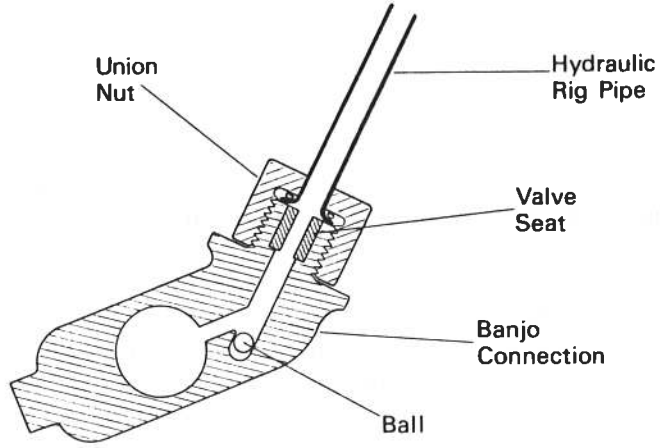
Sectional View of the Banjo Connection as connected to the Hydraulic Rig
